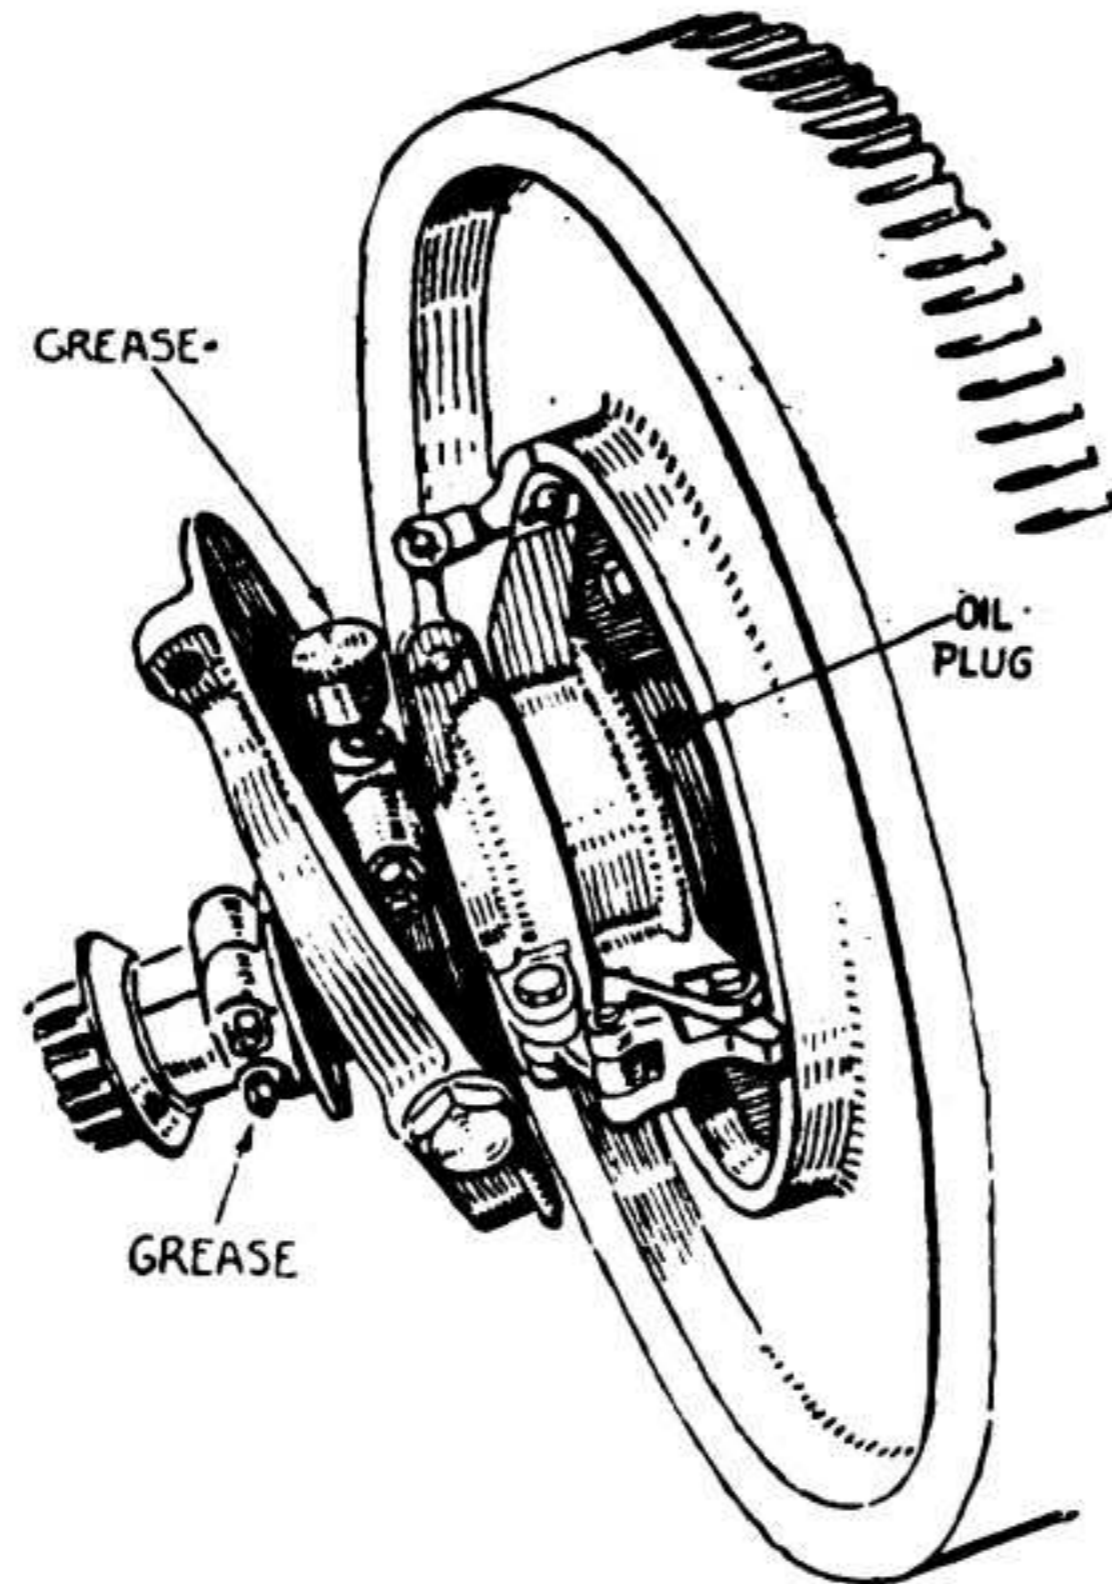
MASTER CLUTCH AND SHIFTER YOKE
